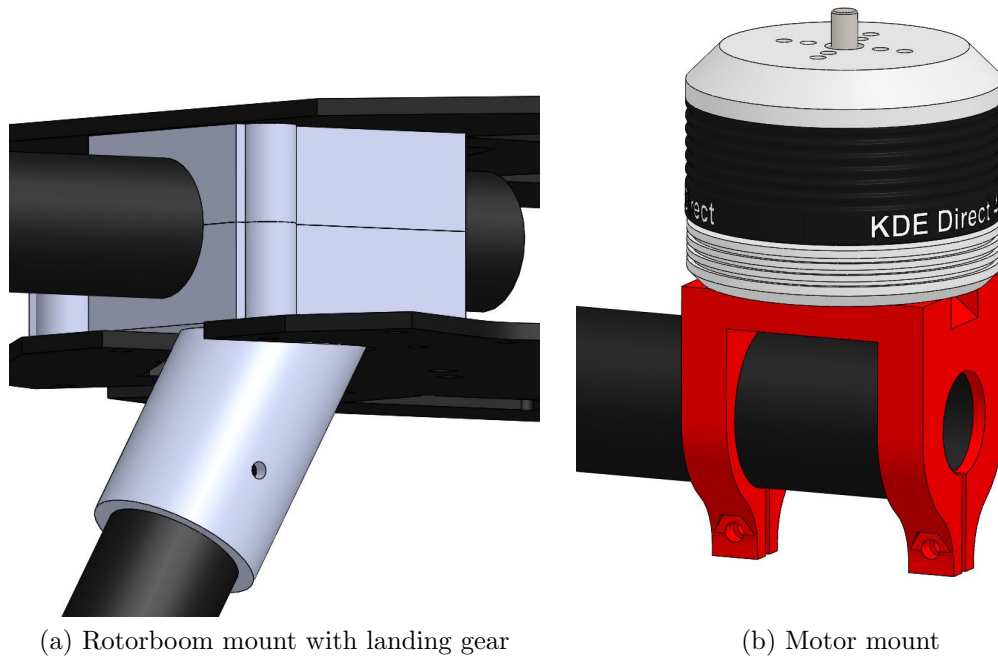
Solidworks CAD representation of the rotorboom mount with landing gear connection and a motor mount.
